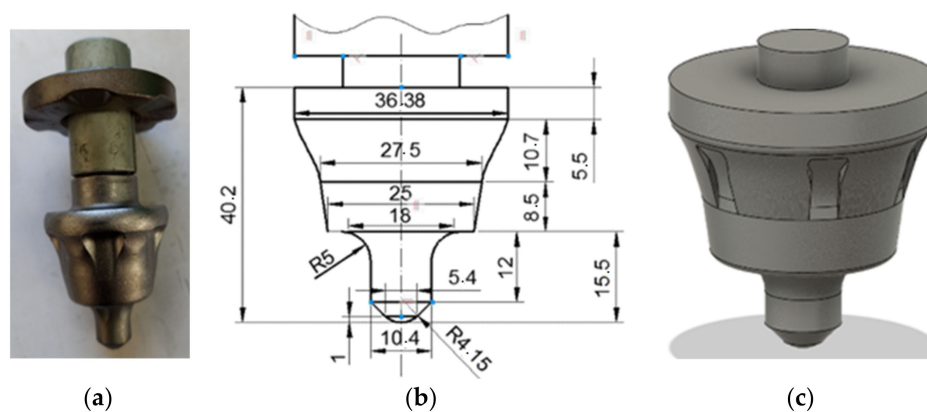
The geometry of milling cutter tooth: (a) real Wirtgen tooth; (b) dimension (in mm) of tooth; (c) the model used in numerical simulations.
